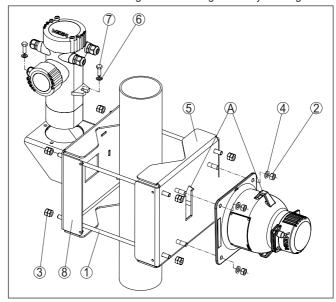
Mounting bracket with vertically mounted sensor (with VEGASOURCE 81, 82)
